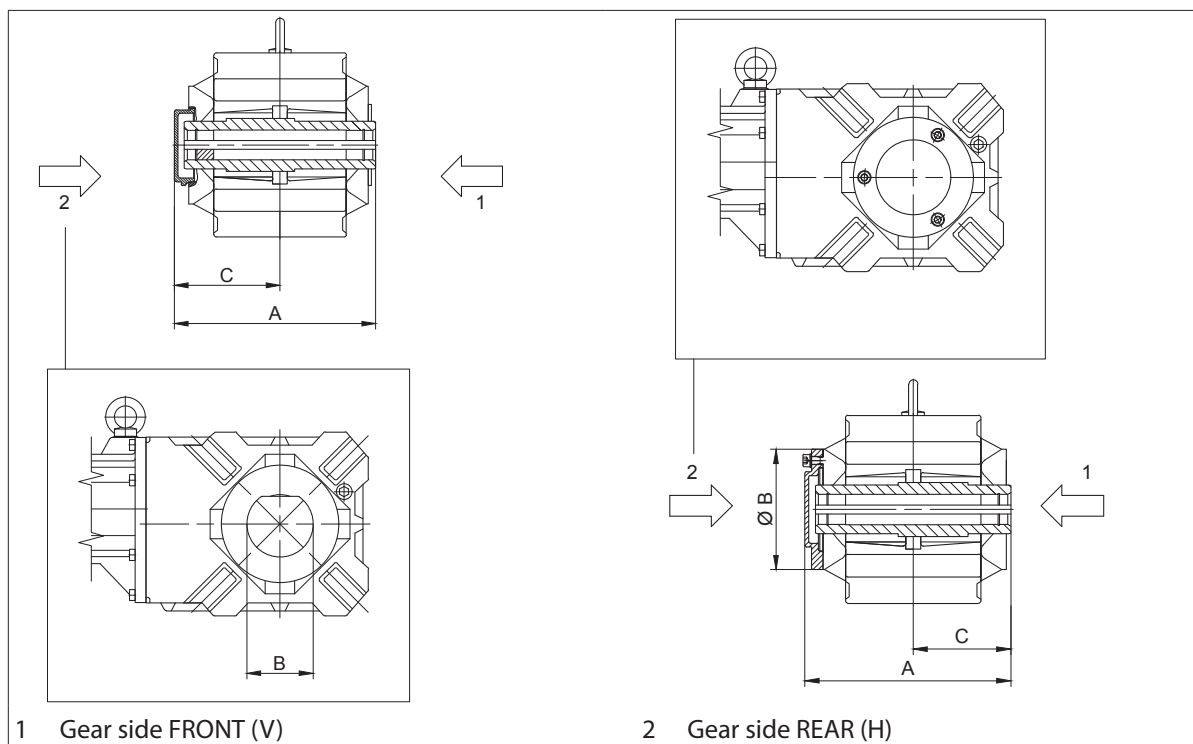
SSV cover for bevel gearbox BK10 ... BK90
